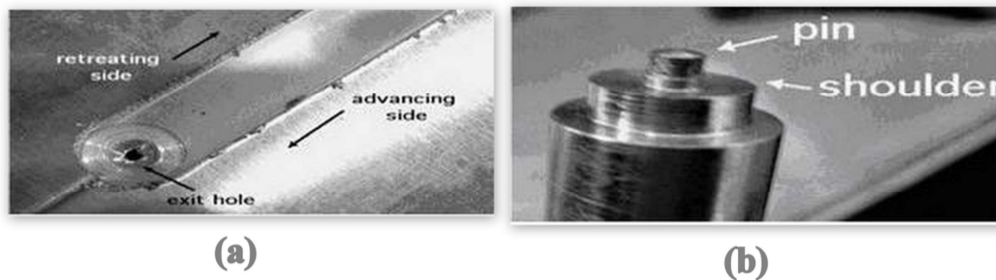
(a) Mode of weld (b) Tool profile for FSW
